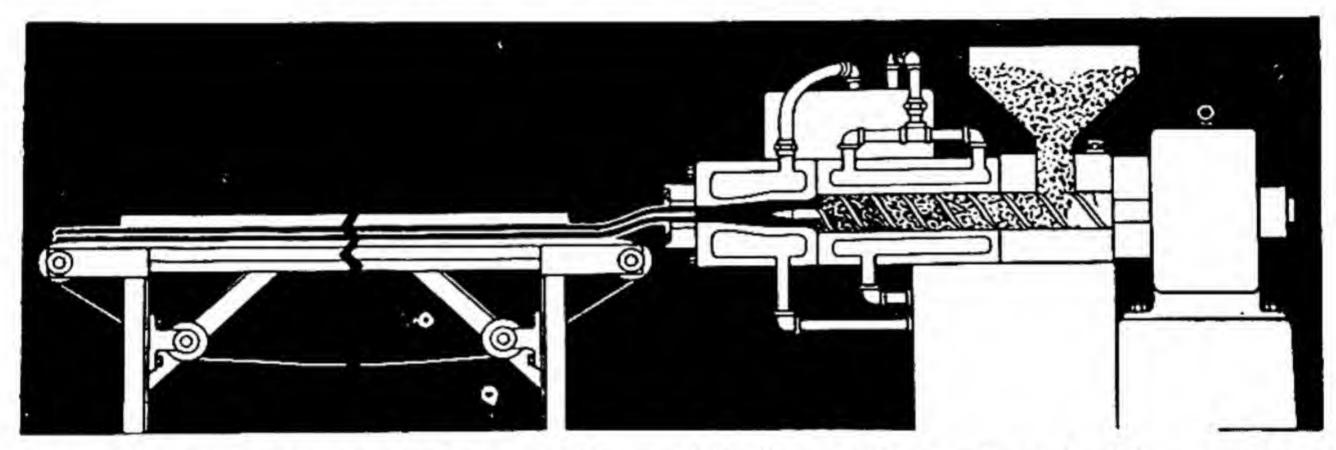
Diagram of an extrusion machine and cooling table equipped with an endless belt.
